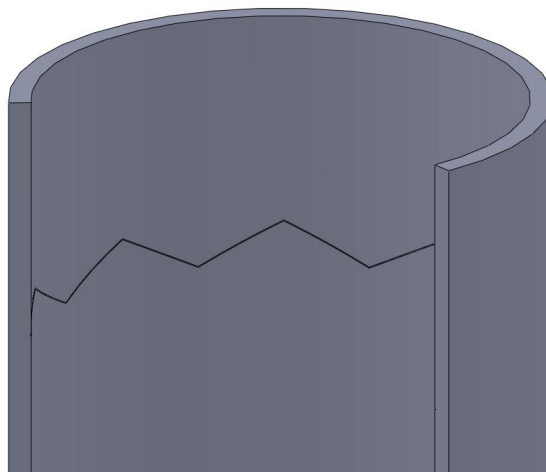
Cutaway of a Cylinder Liner showing the Zigzag Lubricating Grooves
